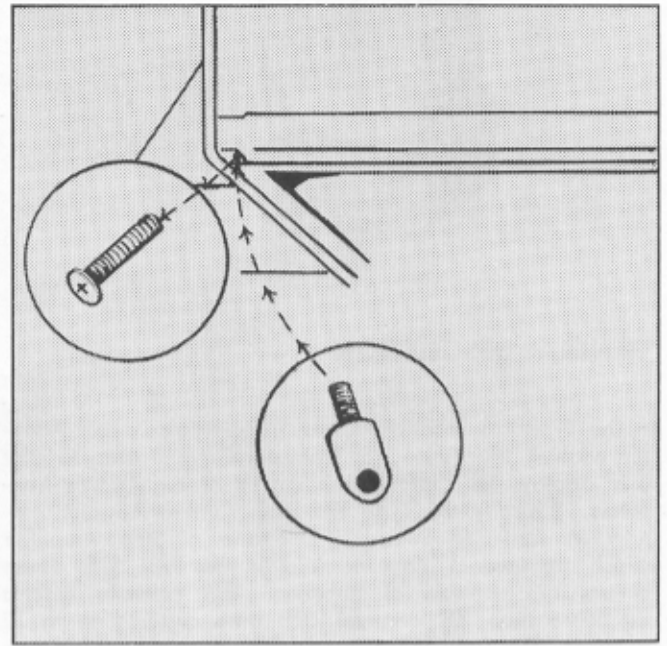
Replacing cabinet bolts with hinge bolts in Type 575.
